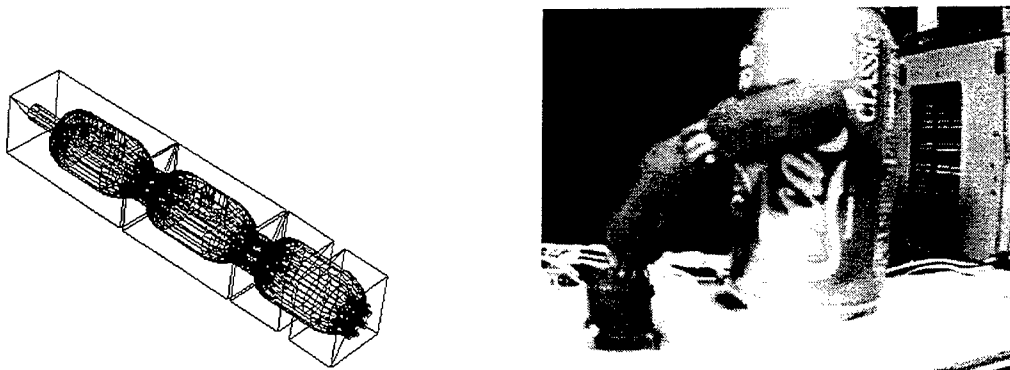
Dual-link robotic manipulator made on the prototype Genie fabricator at Ennex Fabrication Technologies.
